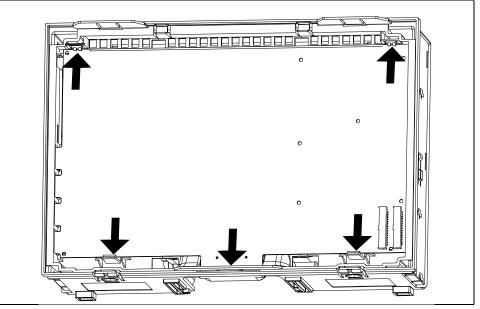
Location of Locking Tabs Securing Processor Board Subassembly
